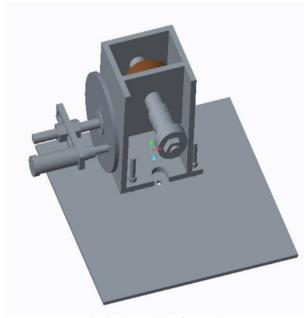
3D model of Attachment Source: - Modelled by using Creo Parametric
